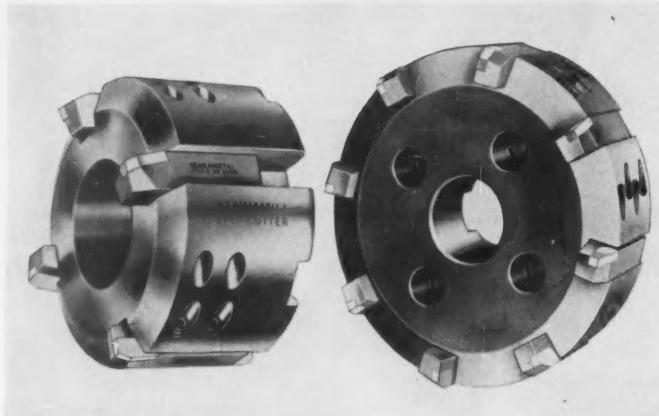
Cutter blades in the step mill, left, may be set at different levels to divide the total depth of cut into several steps. The odd-job cutter, right, is used for deep or complex cuts.
